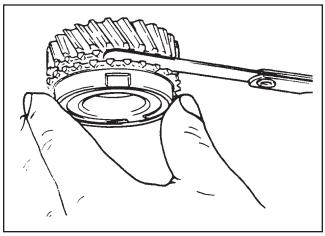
H-18. Synchronizer Ring-to-Gear Clearance
